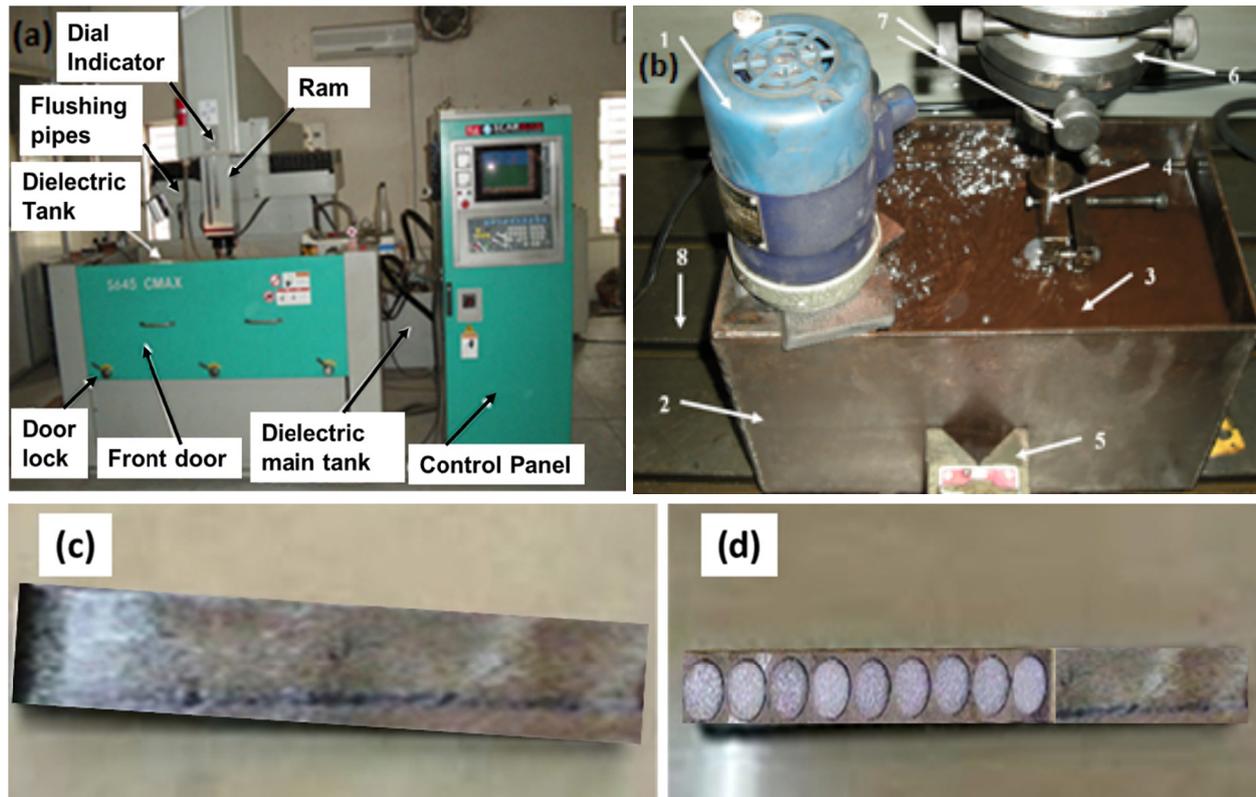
EDM machine and specimen used in this study: (a) during machining by EDM; (b) pictorial view of used EDM machine; (c) specimen before machining; and (d) specimen after machining
